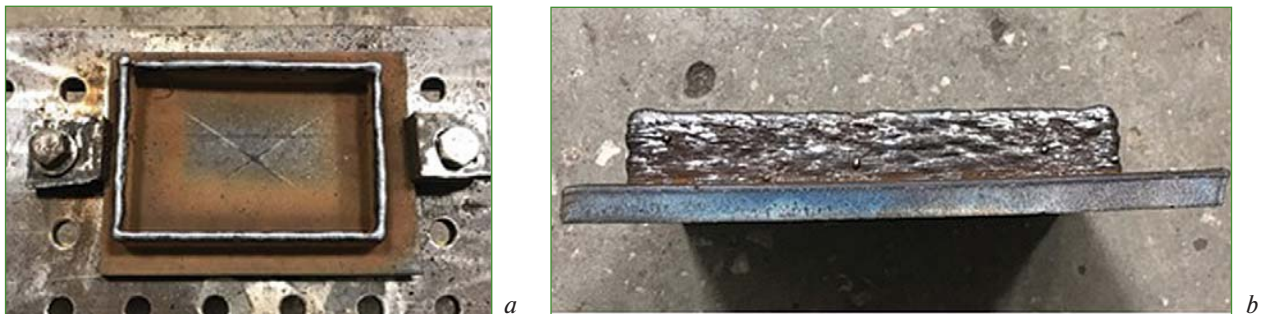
The real grown-up rectangle with 18 layers (a) and growth trajectory kind after welding deposition – side view (b)
